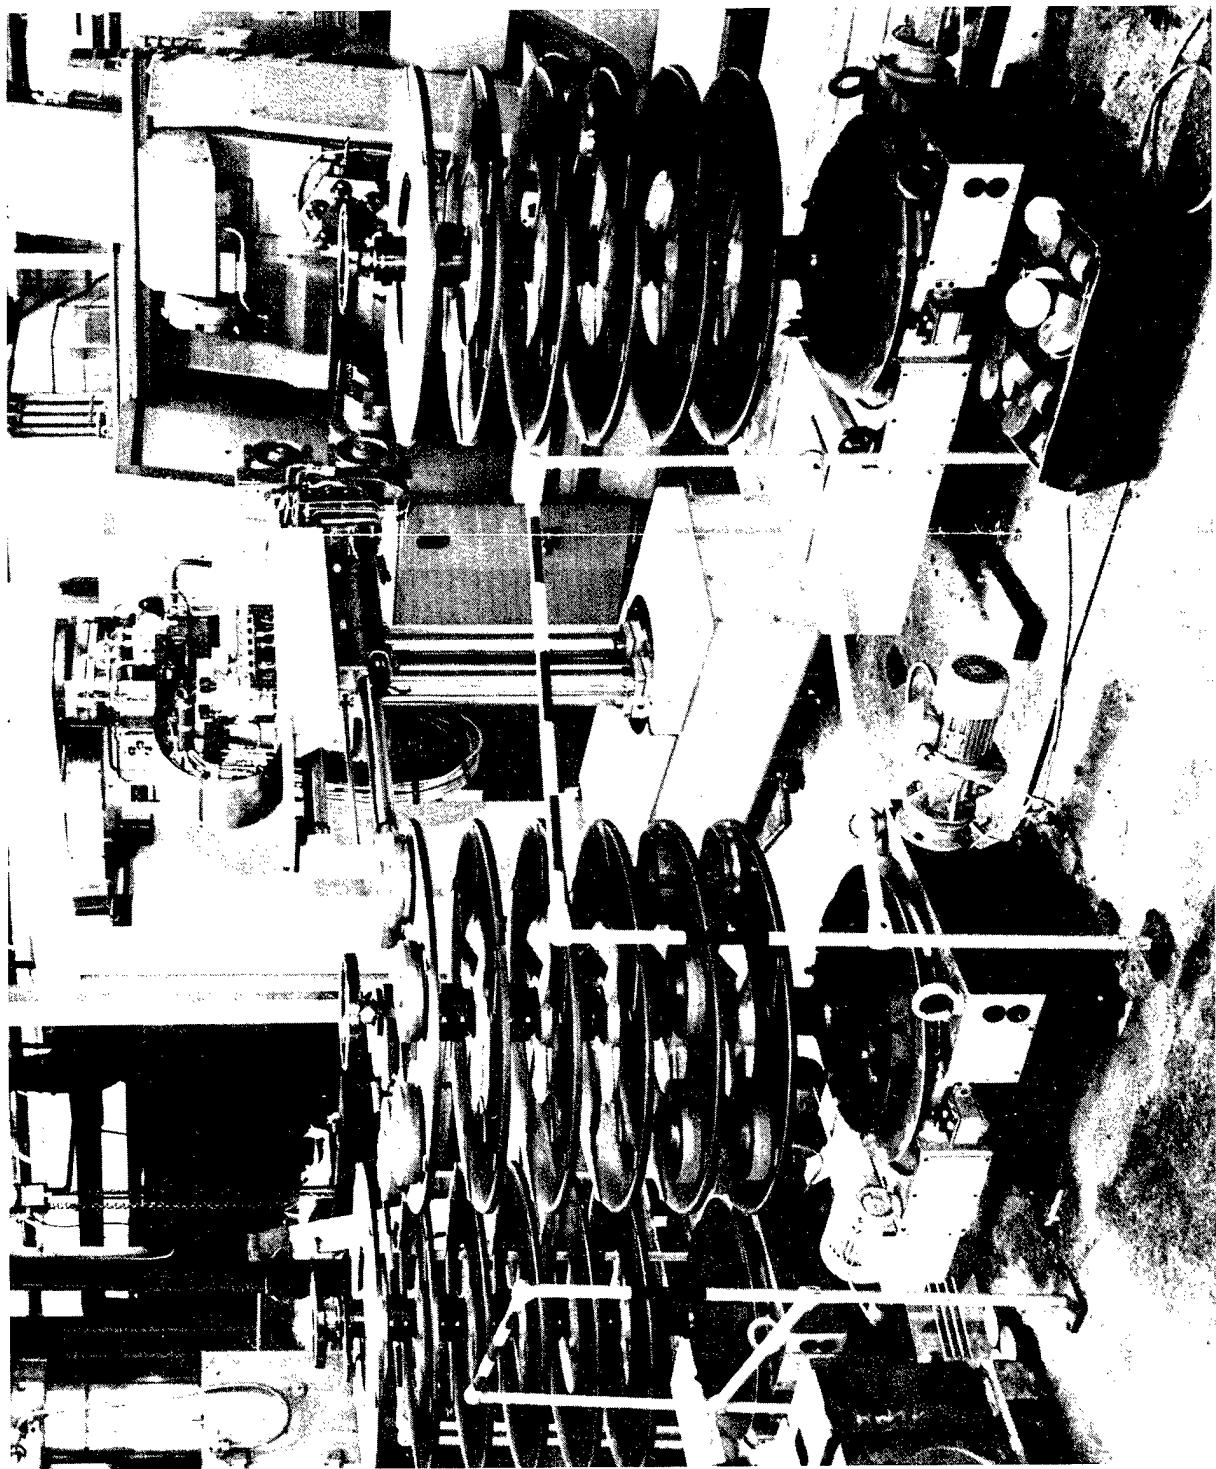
Rotation/translation robot IR 2/S2 for loading a machine tool (figure: BWF [expansion unknown]).
